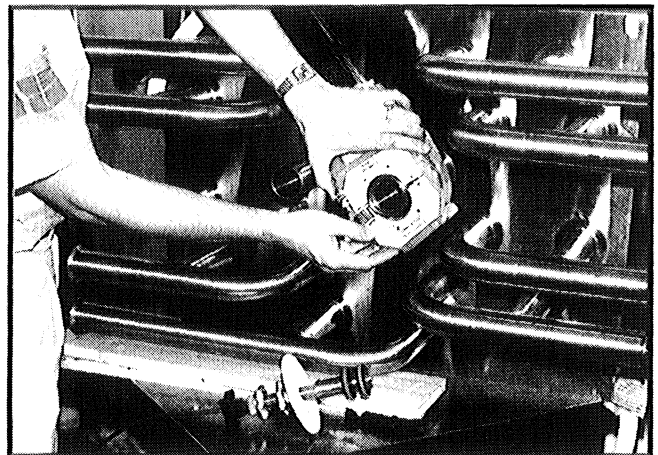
An orbital pipe-welding unit. The inert gas-purging unit is shown at the bottom of the photo. (Photo courtesy of Arc Machines, Inc.)
